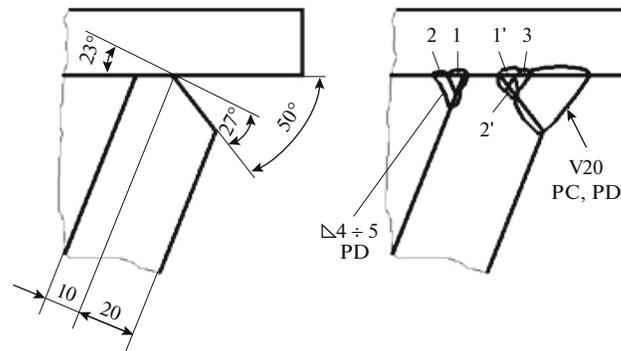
Preparation for welding and sequence of passes—fillet welded joints at the support structure of the bucket-wheel boom.
